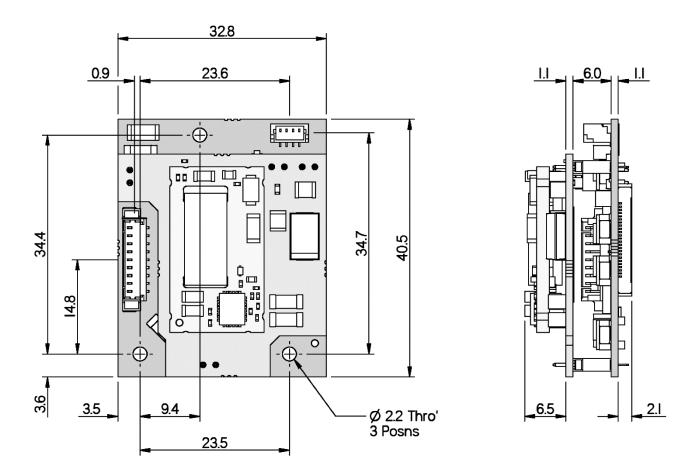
Mechanical overview of the Harrier PoE Connection Board; all dimensions in mm.
